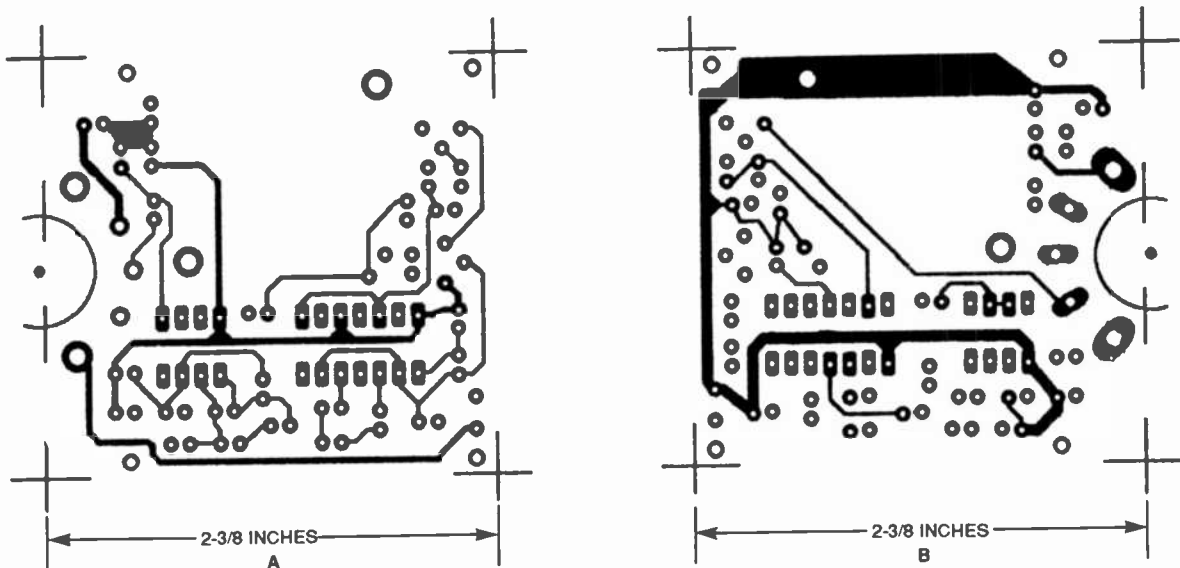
The template for the solder side of the board is shown in A; the component side of the board is shown in B.
